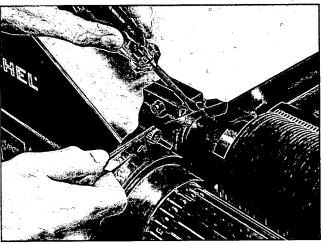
Setting the .004" (.102 mm) clearance between circular knife spindle and bearing.
